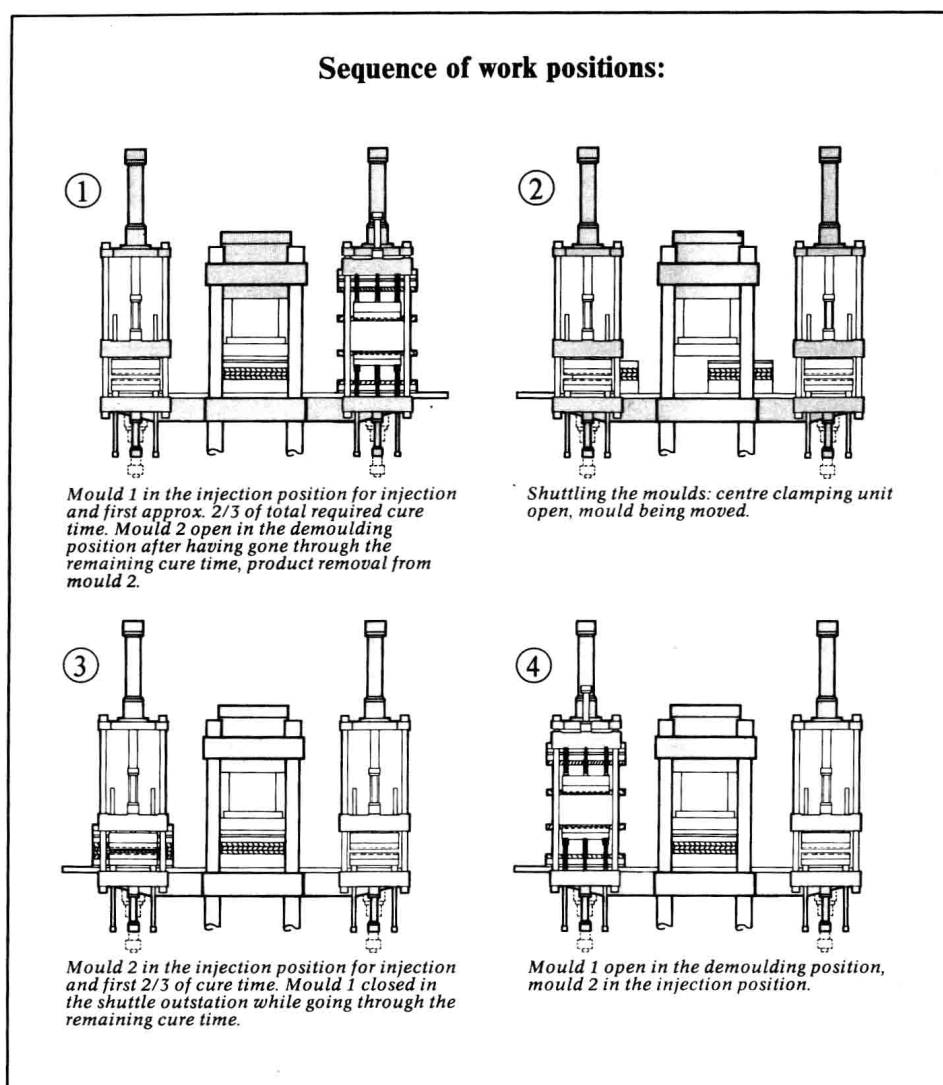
Double shuttle machine (shuttling 2 complete moulds)
